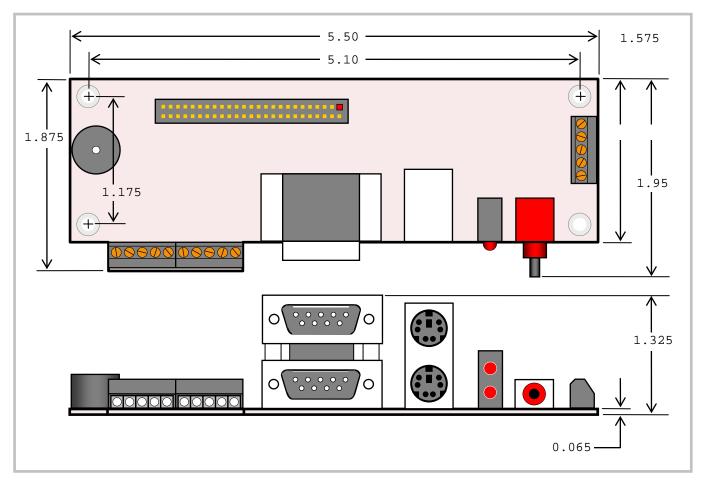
VL-CBR-5009 Dimensions and Mounting Holes
